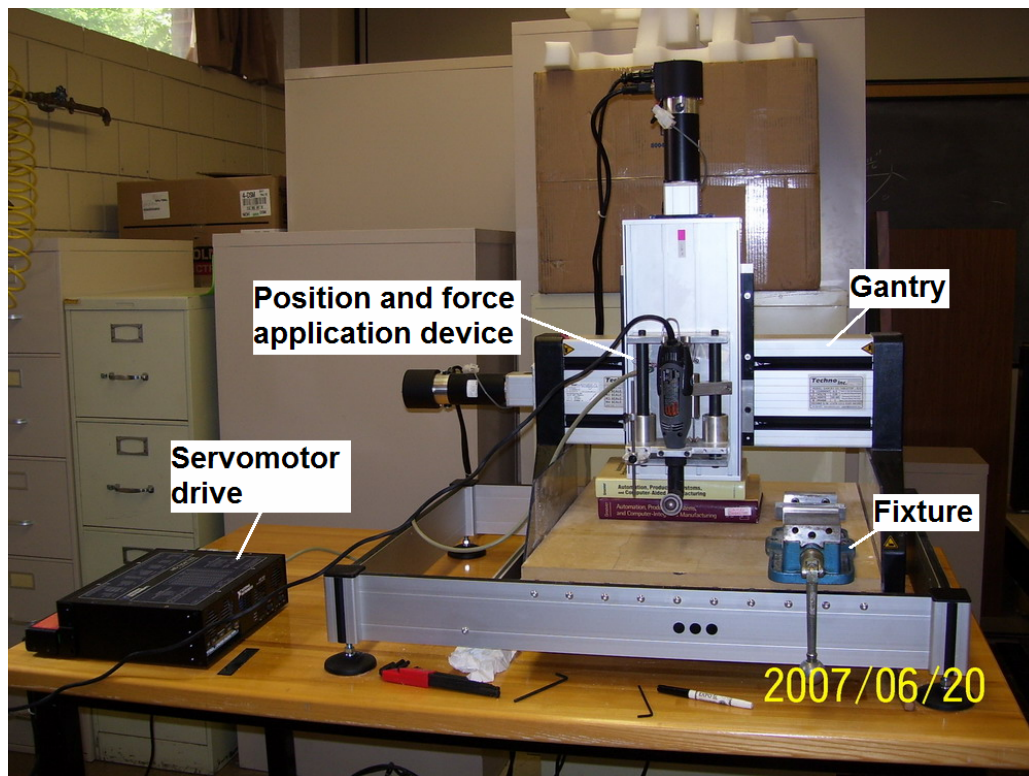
The gantry III system, the servomotor drive and the fixture
